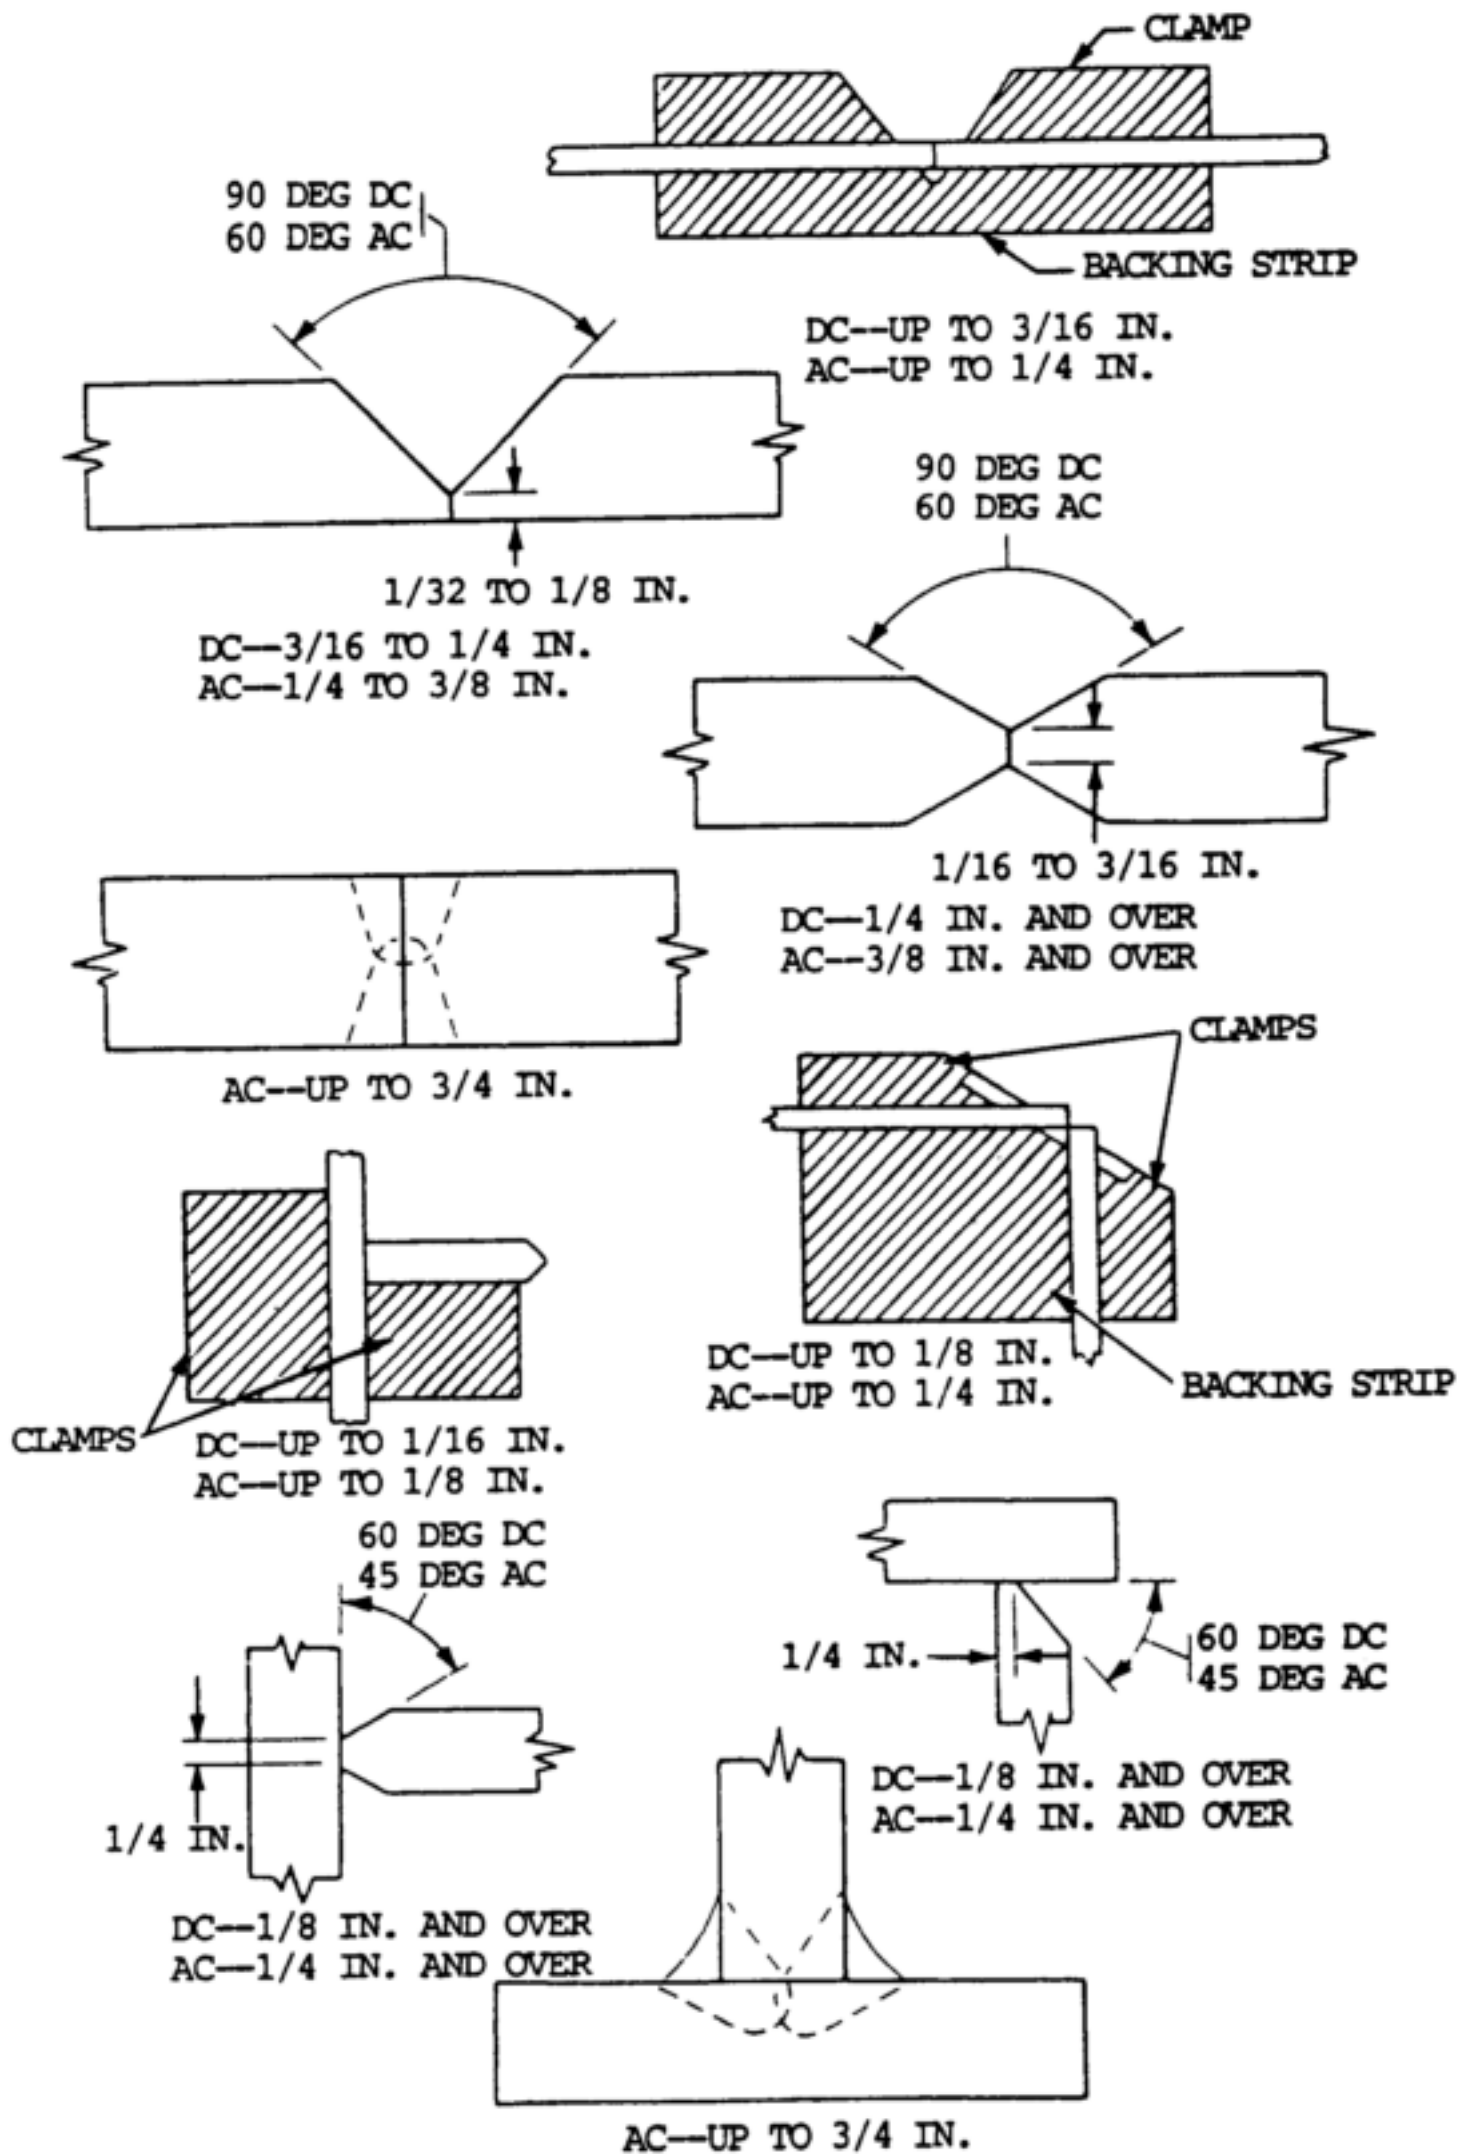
Joint preparation for arc welding magnesium.
